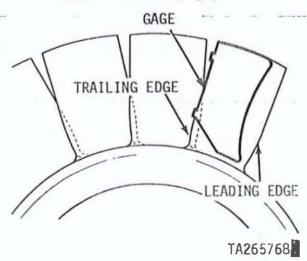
Testing blade erosion with gage superimposed on fan rotor blade
